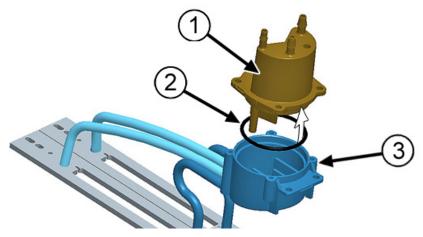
Re-assembling the reservoir. Multiple components removed for clarity. It is not necessary to remove components. Do not attempt to remove the lower reservoir half from the printer.
